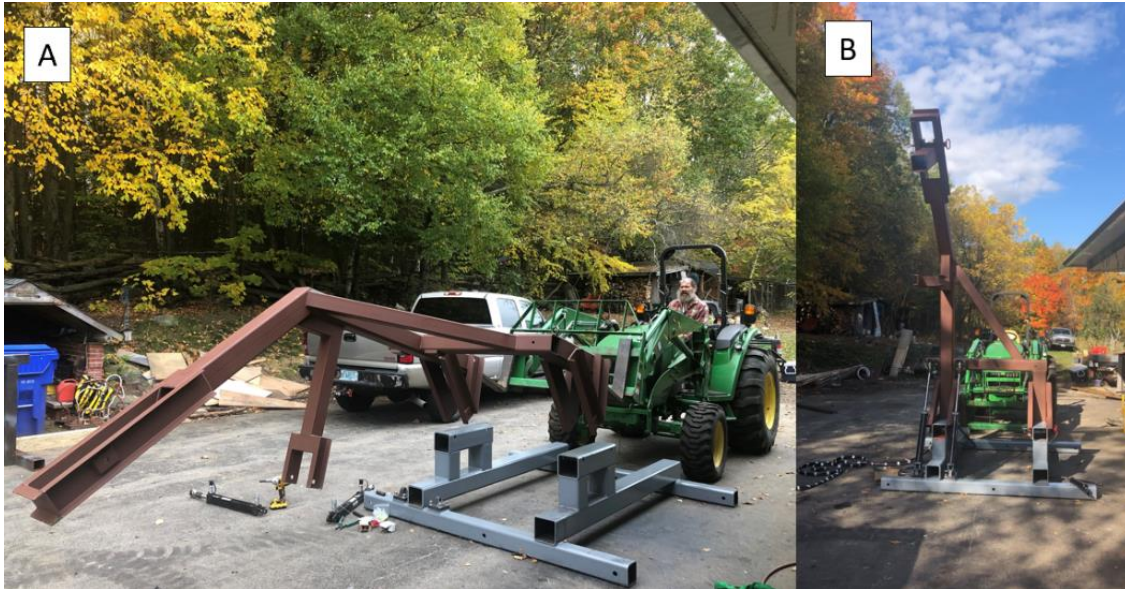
(A) the boom arm of the crane, speared by Prof. Slocum’s tractor, being assembled onto the crane arm base, (B) the crane assembled.
